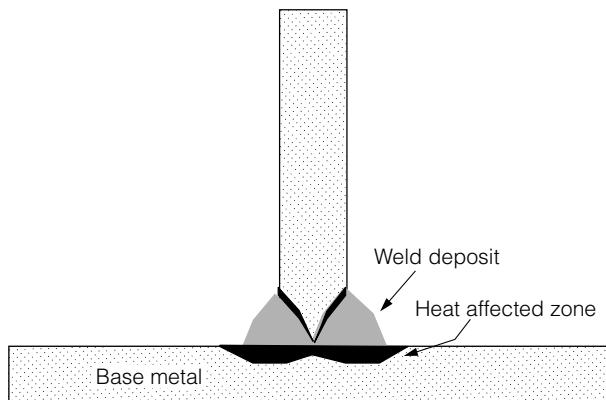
Heat affected zone produced during welding.
